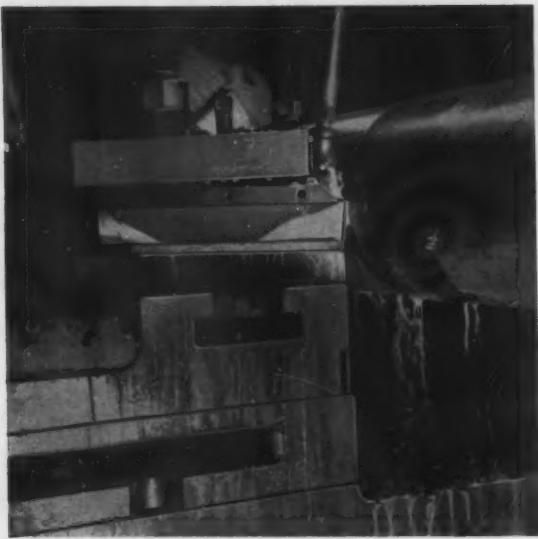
Close-up view of tool under cut, showing rigid design of the lathe carriage.
